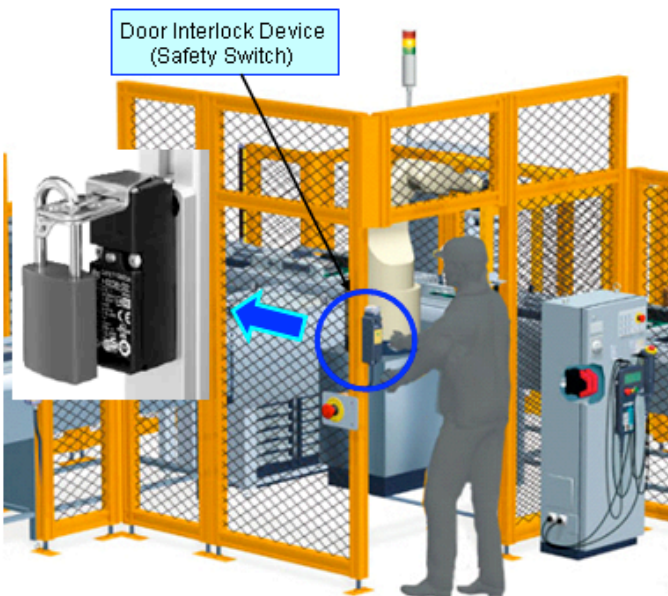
Prevention of machine start-up with a door interlock device when entering the guarded area
